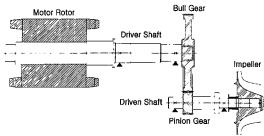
Schematic of a 800RT turbo-chiller rotor-bearing system
